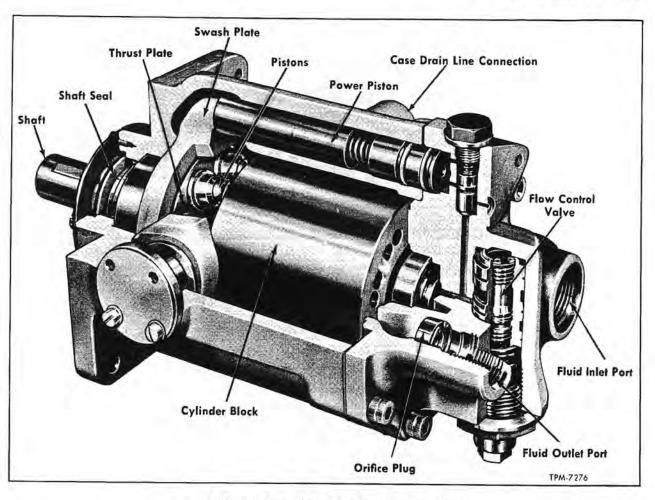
Cut-Away View of Condenser Fan Drive Pump
